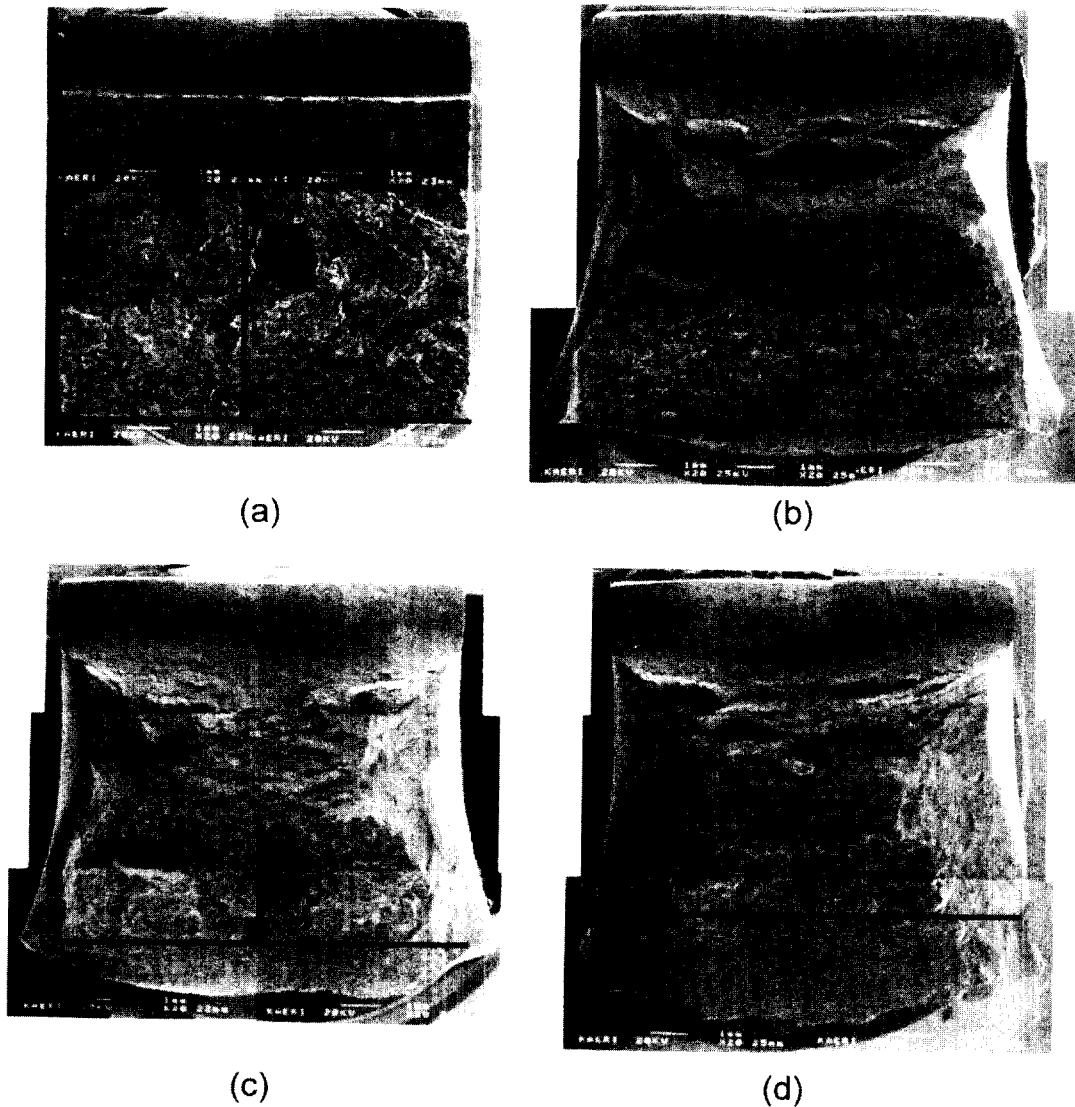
Fractured surfaces of Charpy V-notch specimens tested at (a) -40°C , (b) 21.2°C , (c) 50°C and (d) 90°C .
